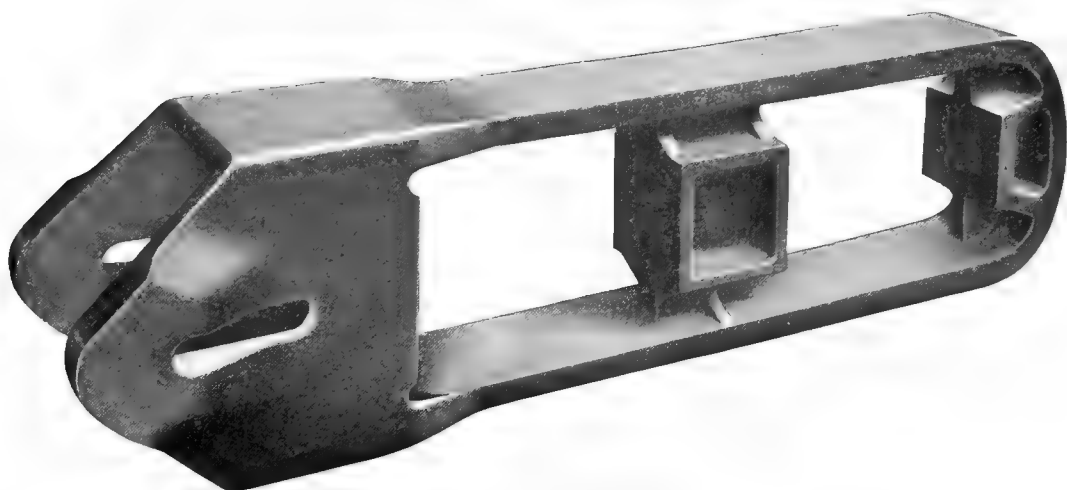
Buckeye Cast Steel Keyed Yoke for Tandem Gears.
